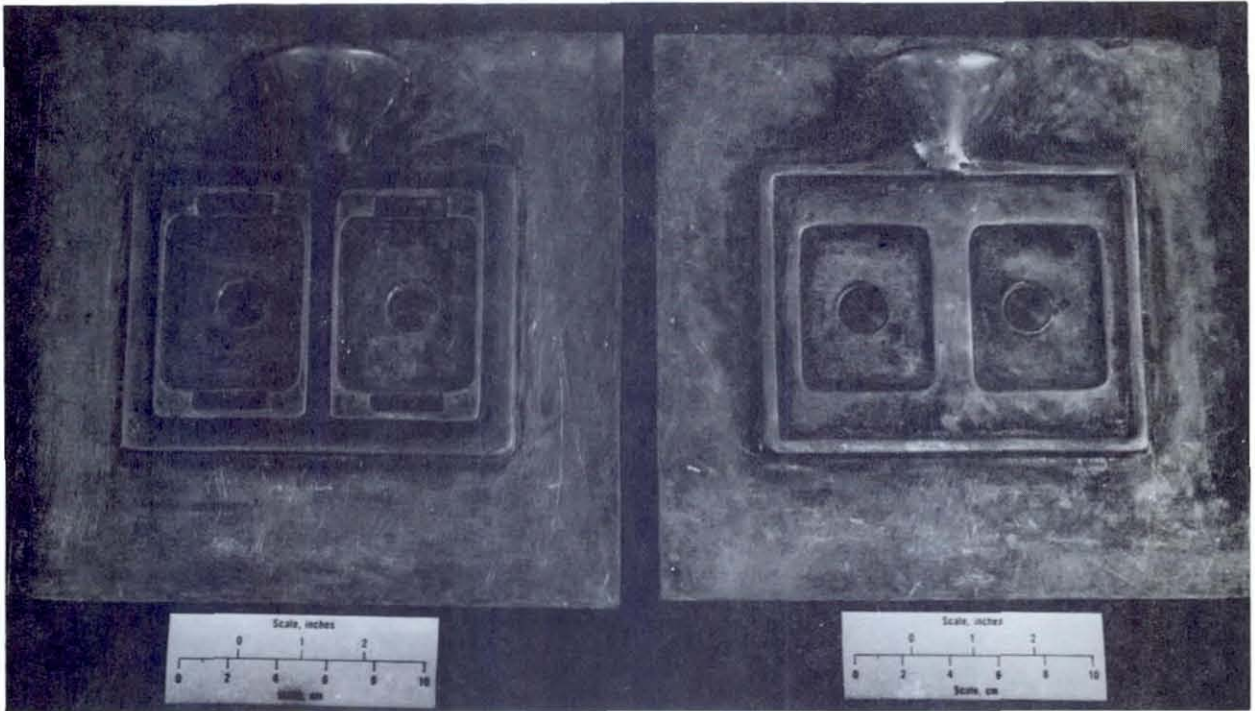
Shell molding pattern for wall plate. Front and back views.
